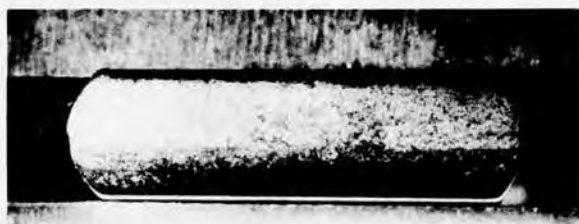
Spring Clutch Outer Ousing Bore After Full-Speed Overrunning Test, Task I.
